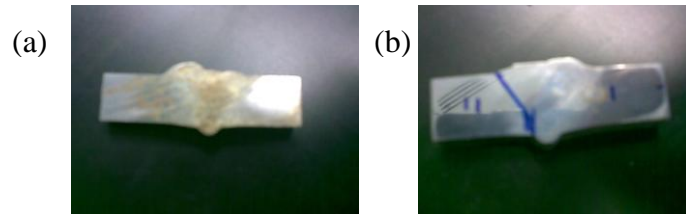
Photographs taken of the weld sample (a) Weld sample before grinding and polishing and (b) Weld sample after grinding and polishing.
